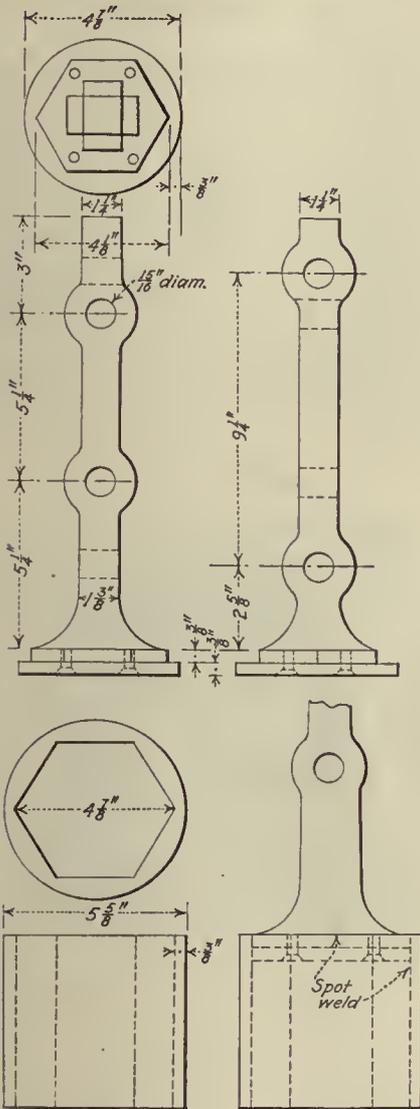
At top, stem for wrench. Fig. 2—Bottom, left, socket. Fig. 3—Bottom, right, assembly of parts
